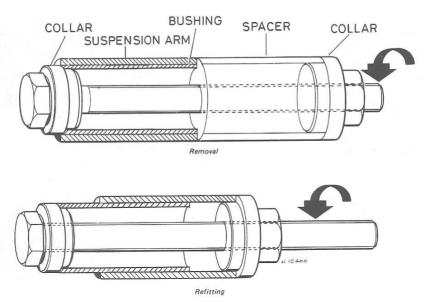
Drawbolt tool for removing and installing suspension arm pivot bushings - KLT200 C and KLT250 (Sec 6)
